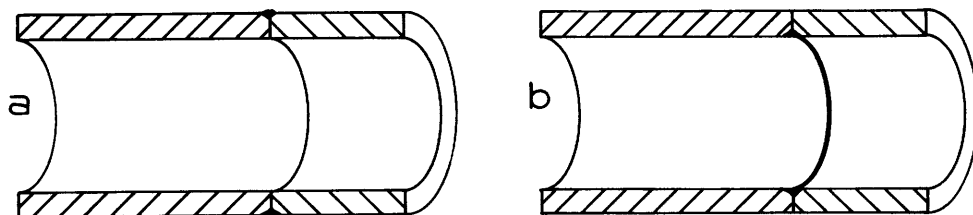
E2. Cutaway views of welds between two tubes. (a) Weld on outside, crack on inside may cause virtual leak. (b) Weld on inside, no virtual leak.
